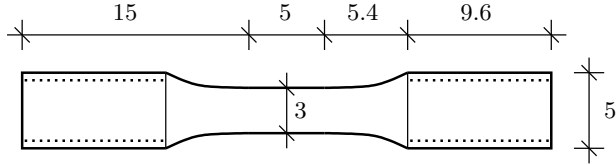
Specimen geometry for tensile tests. Dimensions in mm.
